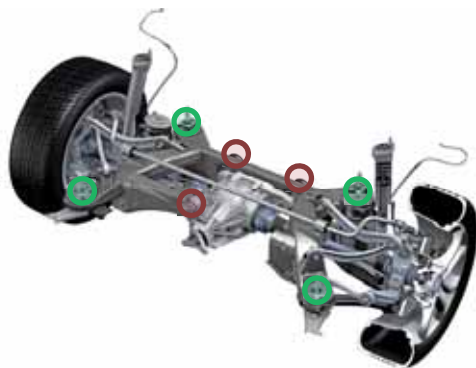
Example rear axle assembly (red markers: mounts of differential gear box, green markers: rear sub frame mounts) Source: Daimler AG.
